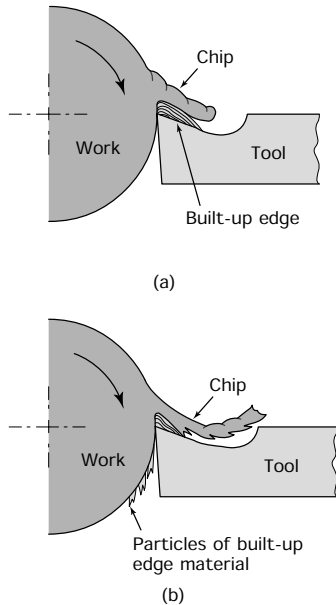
Chip welding (built-up edge): (a) layers of chip material form on the rake face of the tool; (b) excessive chip welding produces an unstable built-up edge; particles of built-up edge material flake away and adhere to the workpiece, making it rough and spoiling the surface finish
